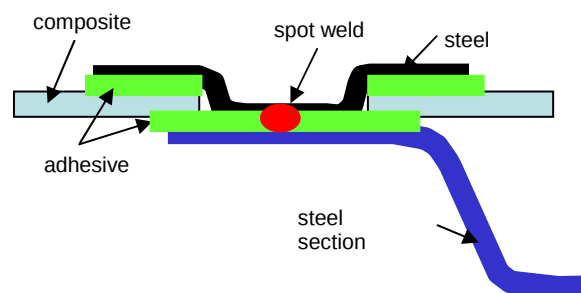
Weld-bonding concept for steel bonded to composite, using a metal doubler.
